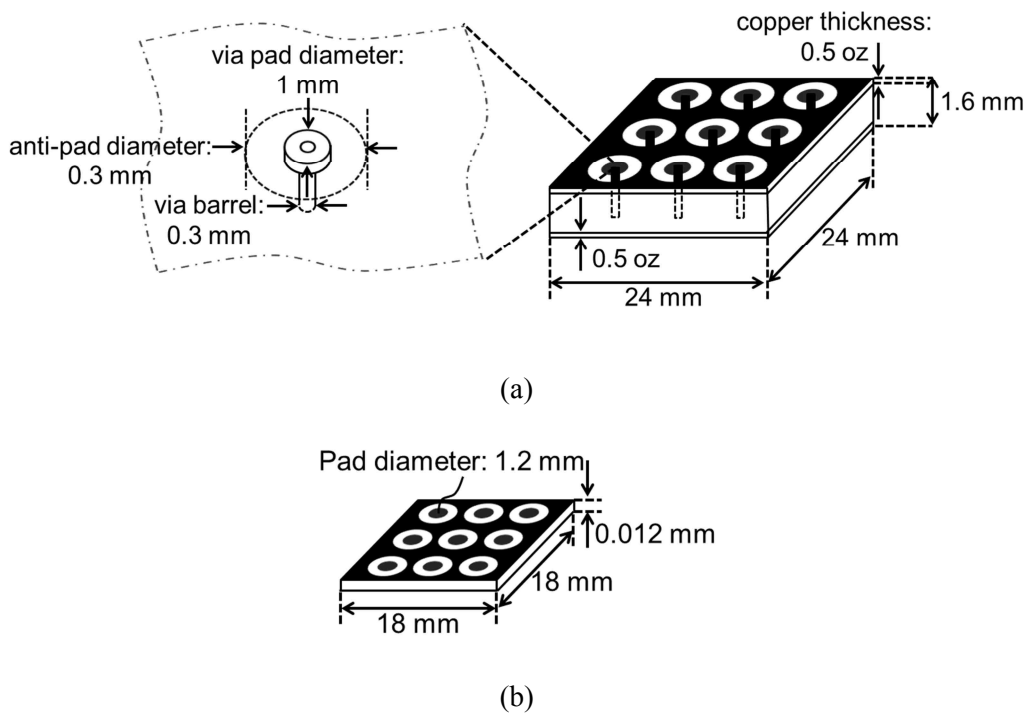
Dimension of PCBs: (a) the DUT or the calibration substrate (b) the dielectric contactor
